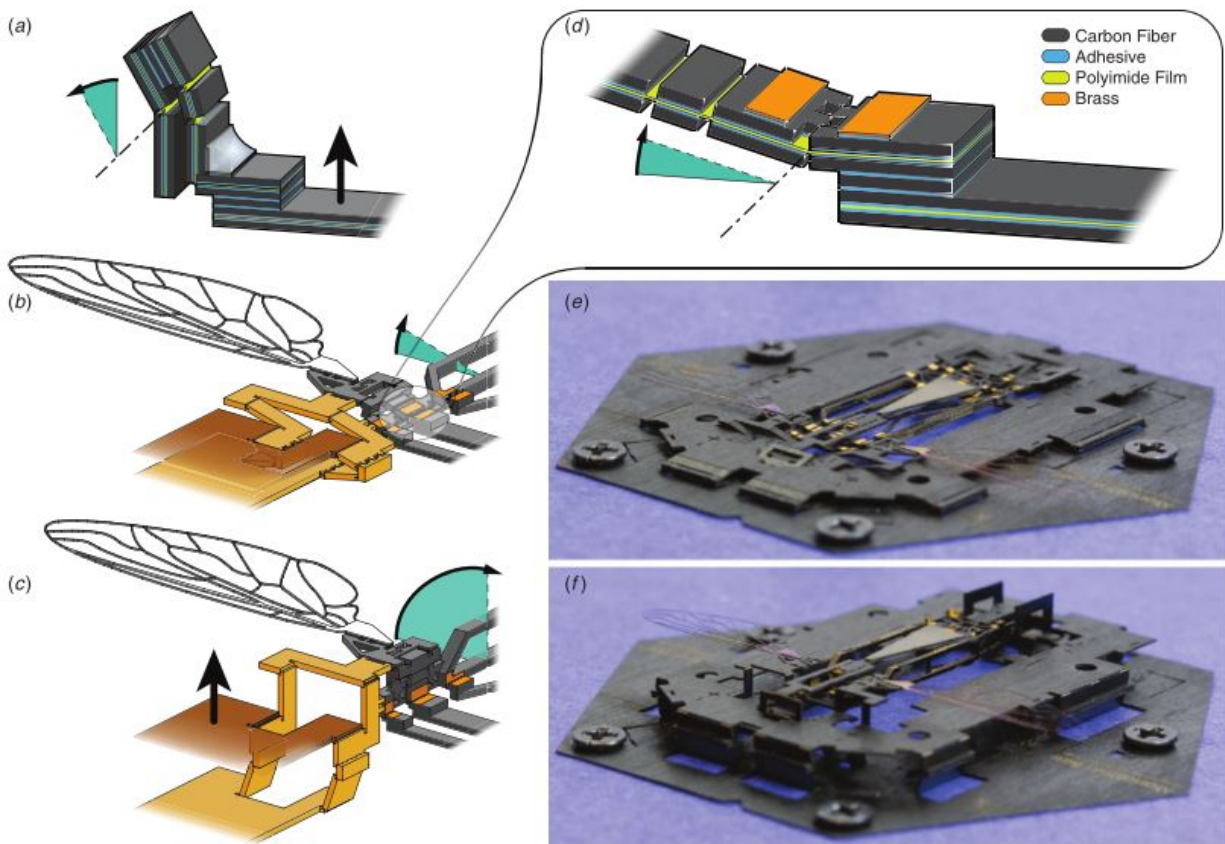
Folding assembly of Mobee PCMEMS device. (a) A four bar linkage turns linear actuation into rotation, also showing solder locking a joint in place. (b) The wing during and after (c) assembly. (d) A castellated joint, showing multiple layers of the device. (e) Mobee before and after (f) assembly with the scaffold frame [25].
